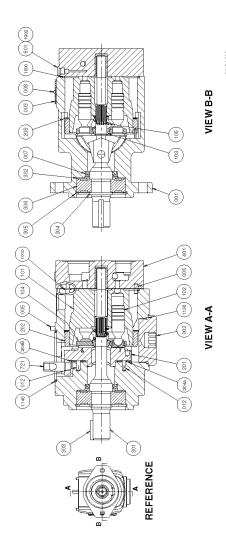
Cross section and plan view parts drawing, PVWJ-011/-014/-022 A-Frame (520024-101 sheet 1 of 4).
